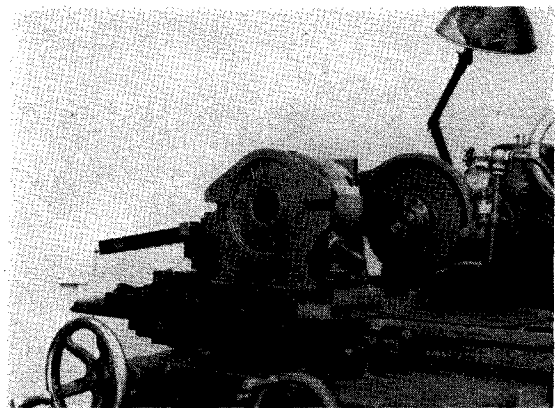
Photographic view of surface grinder set-up for profiling a cylindrical surface of two-meter radius *of curvature. View is from the front of the machine. The carriage 1 of Figs. 3A and B is displaced to the extreme left, and the block being profiled can just be seen below and to the left of the grinding wheel. Parts of the bracket supporting the work (numbered 4 in Figs. 3A and B), the bar 5, the straight edge 9, and the bridge structure 12, are also visible.
